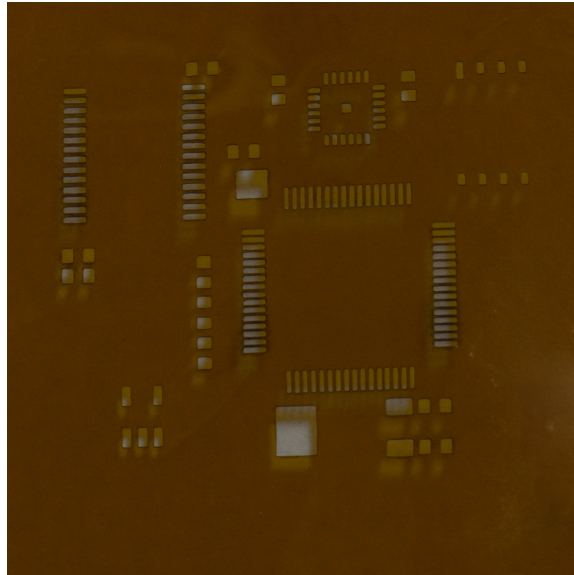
Photograph of the stencil used to apply solder paste to the PCB.
